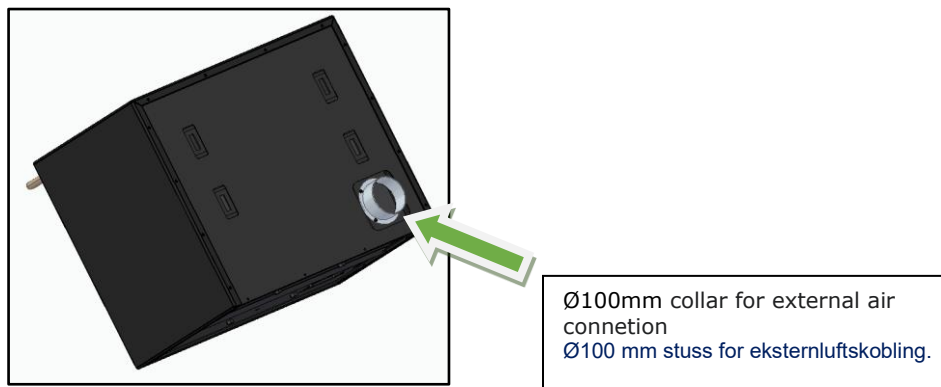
Connection options to the "Outdoor Air Inlet Kit" equipment
